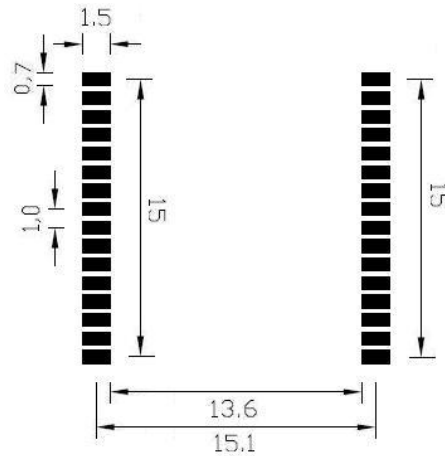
HPZB01-UO module Recommended PCB footprint, Top View
